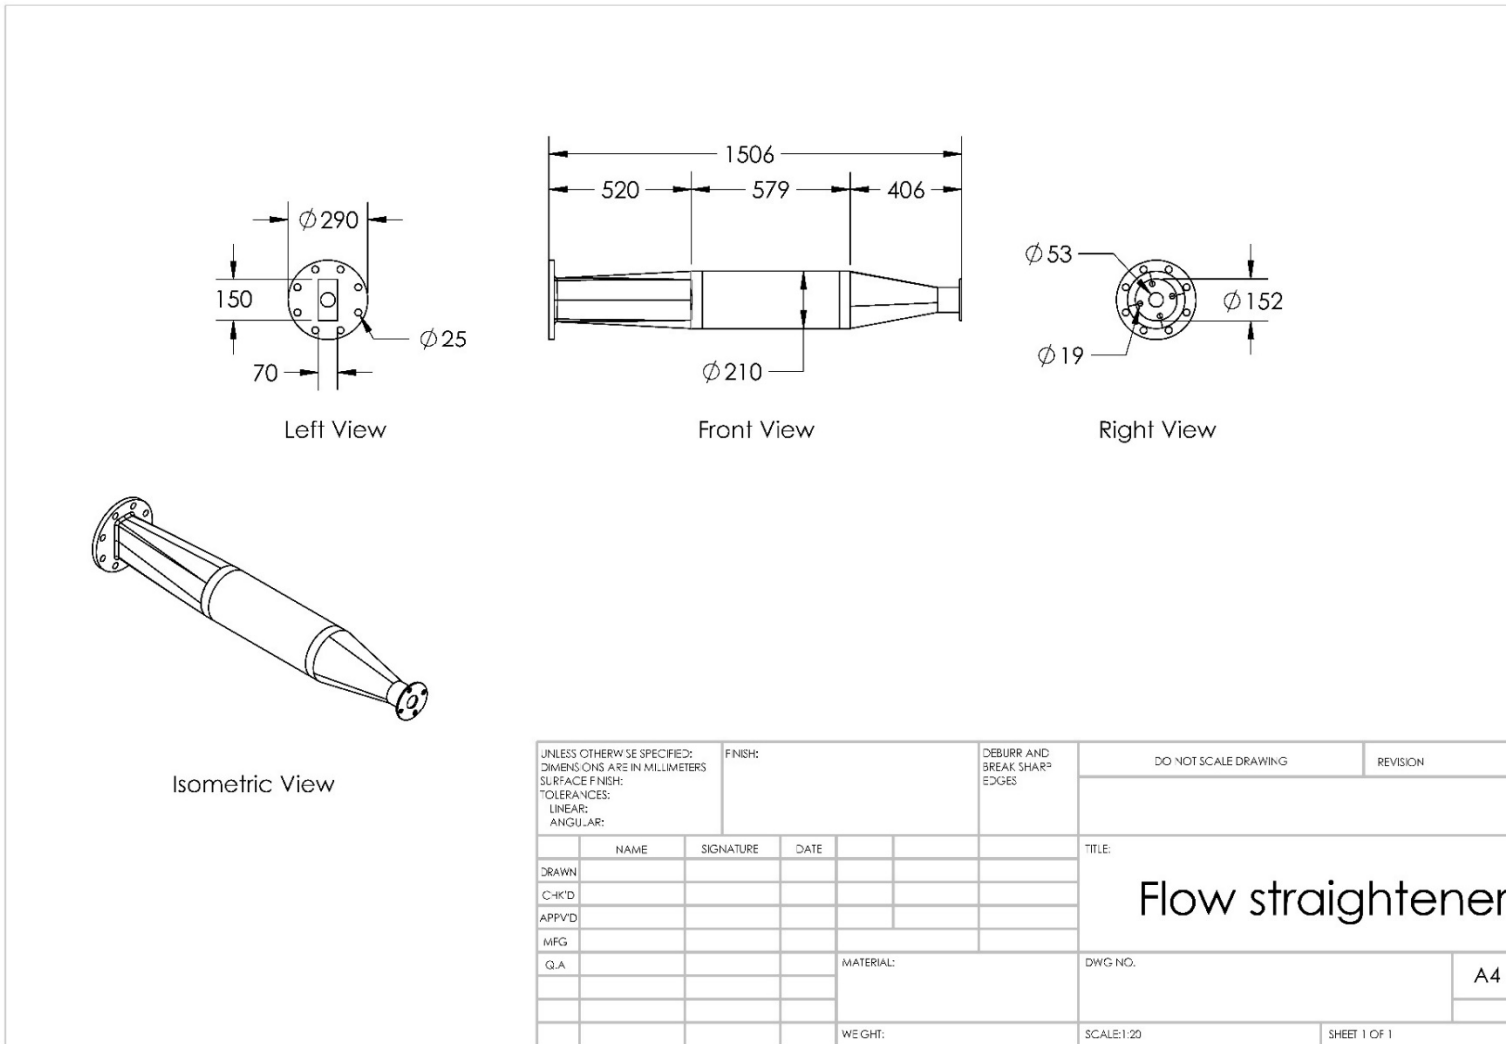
The drawing of the settling chamber (dimensions are in mm).
